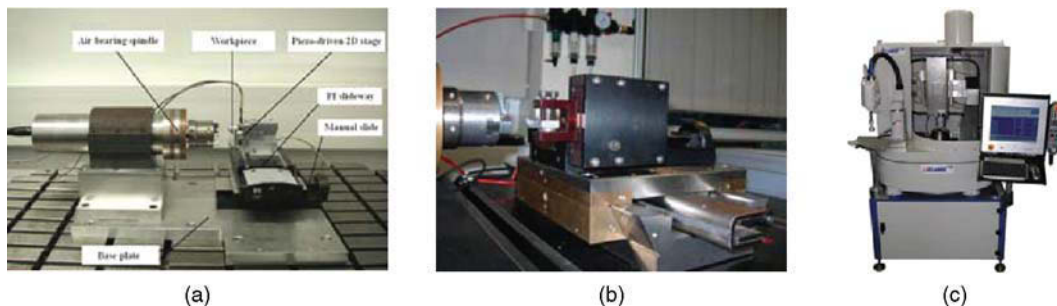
Micro- and meso-machines developed at Brunel University: (a) a desktop micro-milling/turning test rig; (b) a three-axis bench-top diamond-turning machine; and (c) a five-axis bench-top micro-milling machine.
